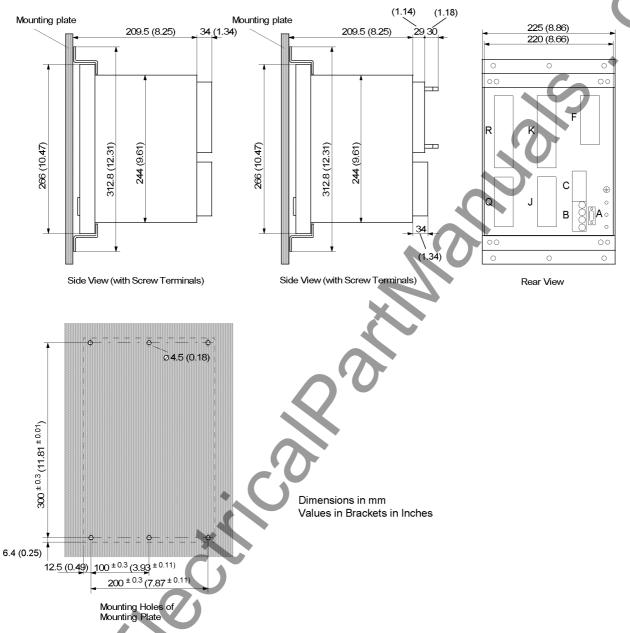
Dimensions of a 6MD63 for panel surface mounting with detached operator panel or without operator panel (housing size 1/2)
